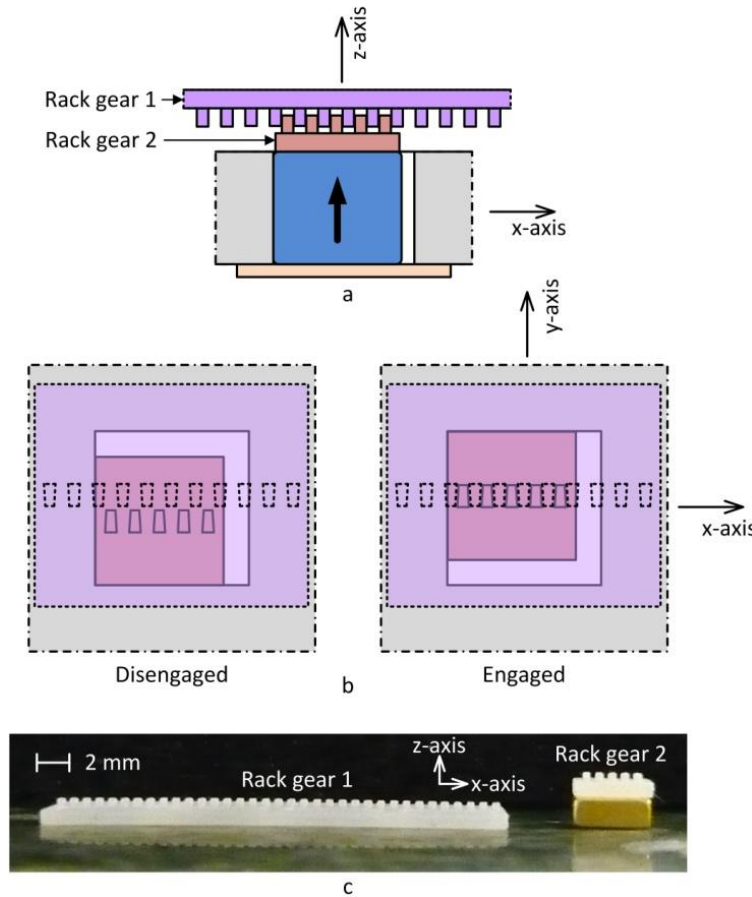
Principle of a linear conveyor based on the digital actuator: (a) side view, (b) top view, (c) picture of the two rack gears.
